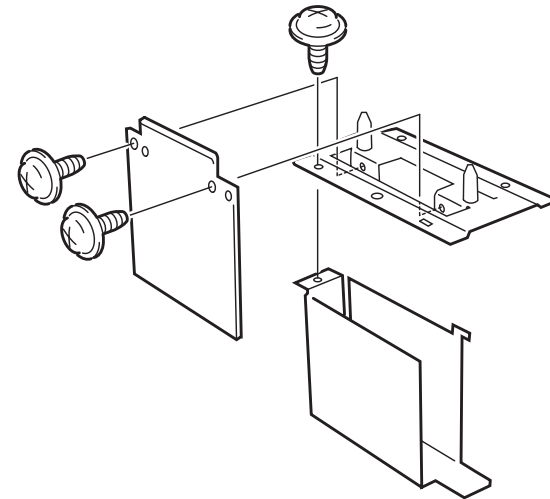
Removing the 500-sheet Cassette Unit Control Board
